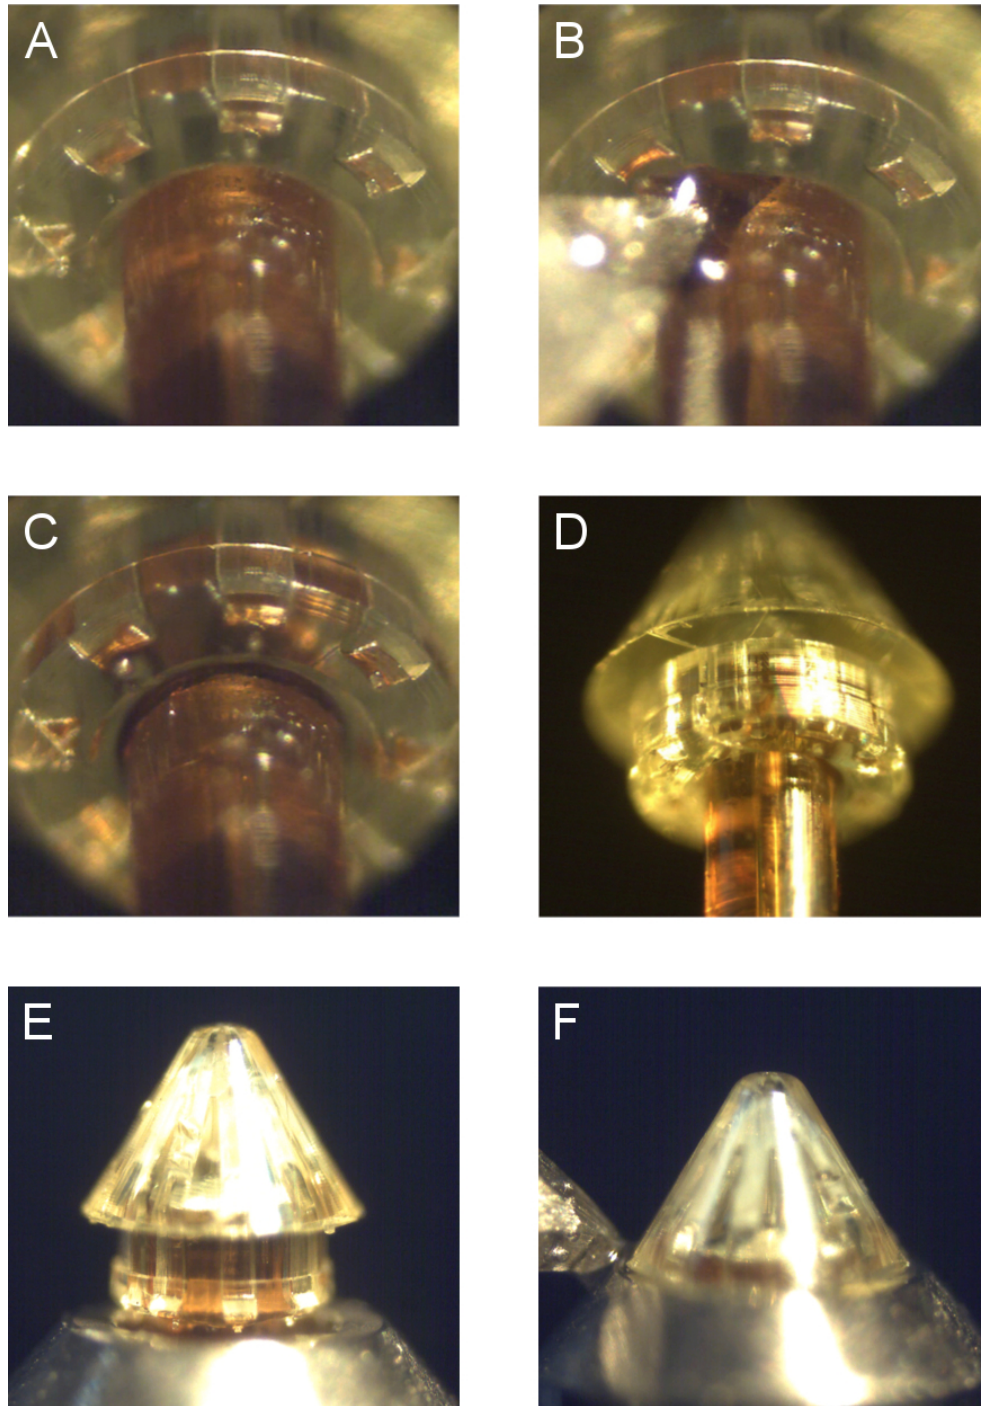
Gluing of the 360- μm outer diameter / 50- μm inner diameter liquid supply capillary into the prototype 1 3D printed nozzle, and subsequent gluing of the nozzle to a stainless steel sleeve: A) capillary inserted; B) gluing using the tip of a hypodermic needle attached to an electronic micromanipulator; C) epoxy is drawn completely around the capillary because of the glue-guide; D) image of nozzle glued to the capillary; E) capillary and nozzle fed into the beveled end of a stainless steel sleeve and held in place by friction; F) gluing the nozzle in place by rotating the sleeve and nozzle relative to the stationary glue applicator.
